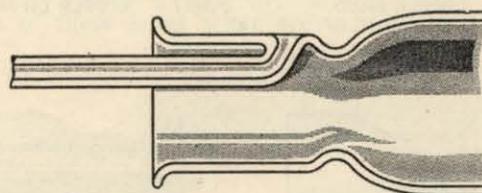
A FLAT PINCH SEAL IN WHICH THE EVACUATING TUBE IS SEALED INTO THE PINCH
